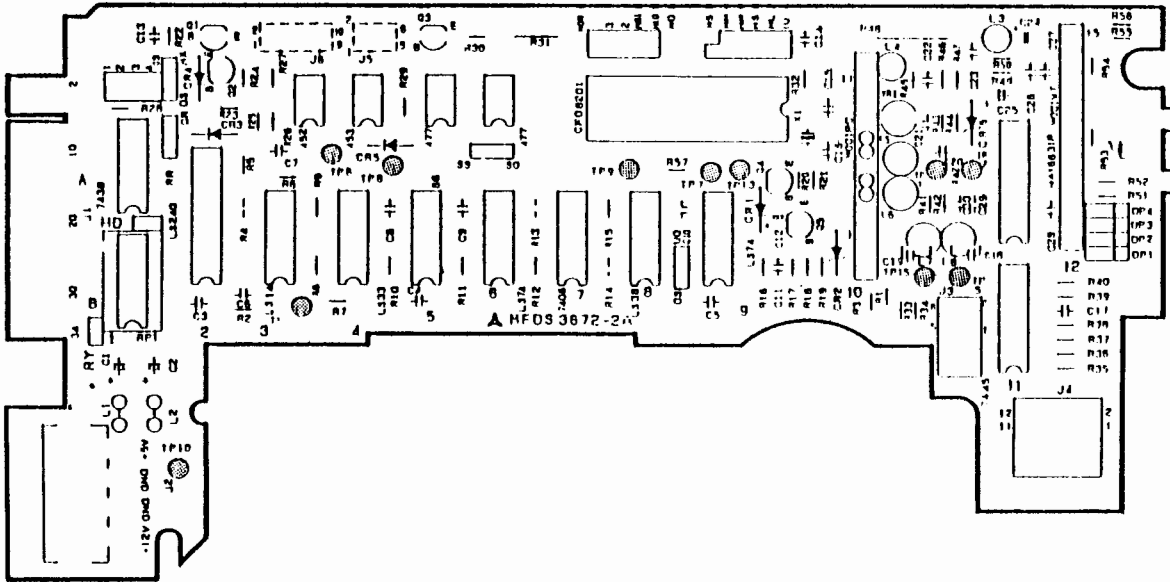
PCB COMPONENT/TEST POINT LOCATIONS, P/N 25284 (455), P/N 25286 (485)
